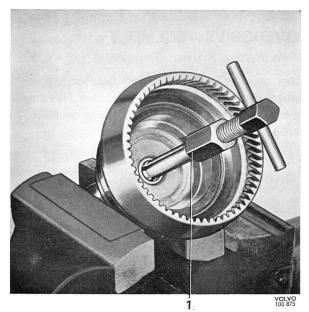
Output shaft bushing removal 1 Puller 2423
